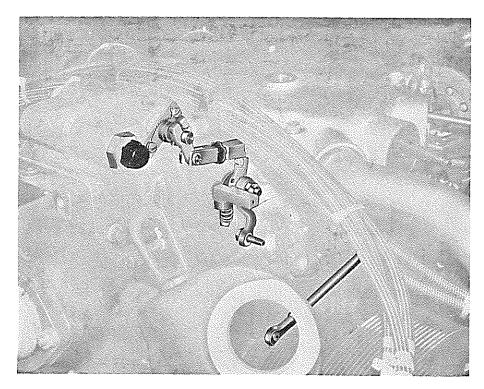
Obtaining Clearance of Throttle Lever in Closed Position
